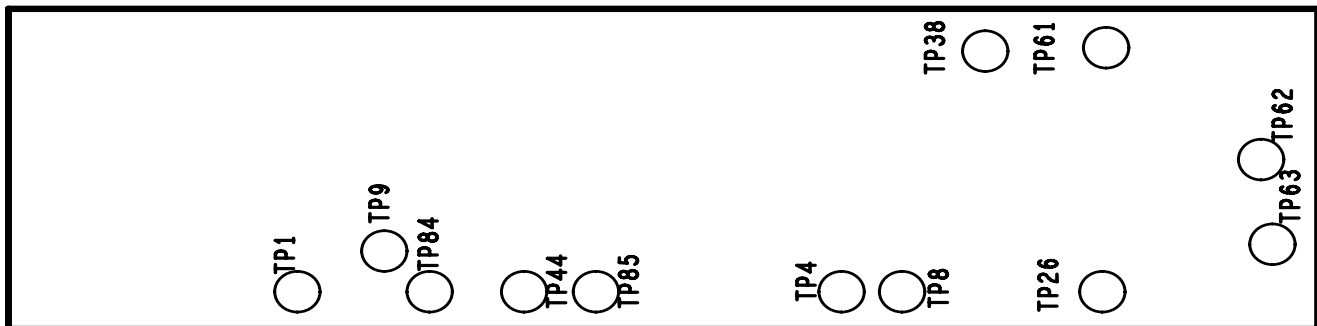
1322x USB Dongle PCB Test Points (Bottom View)
